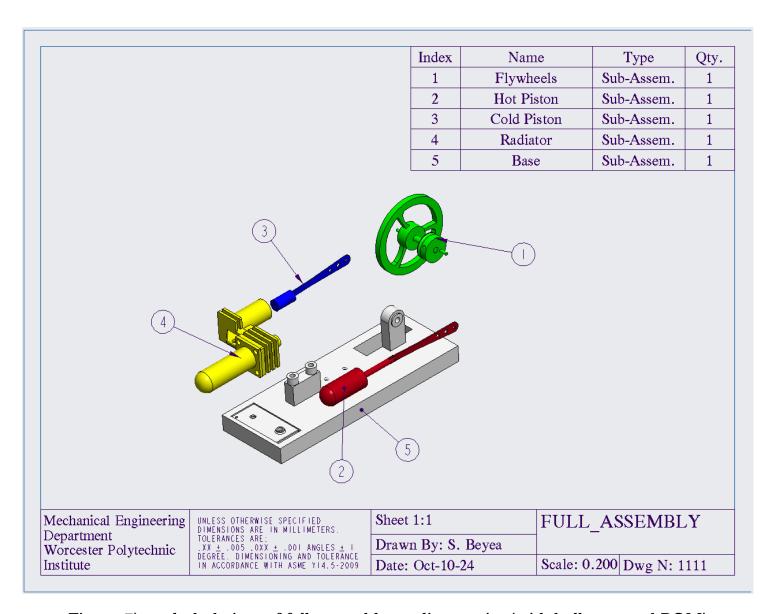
exploded view of full assembly sterling engine(with balloons and BOM)
